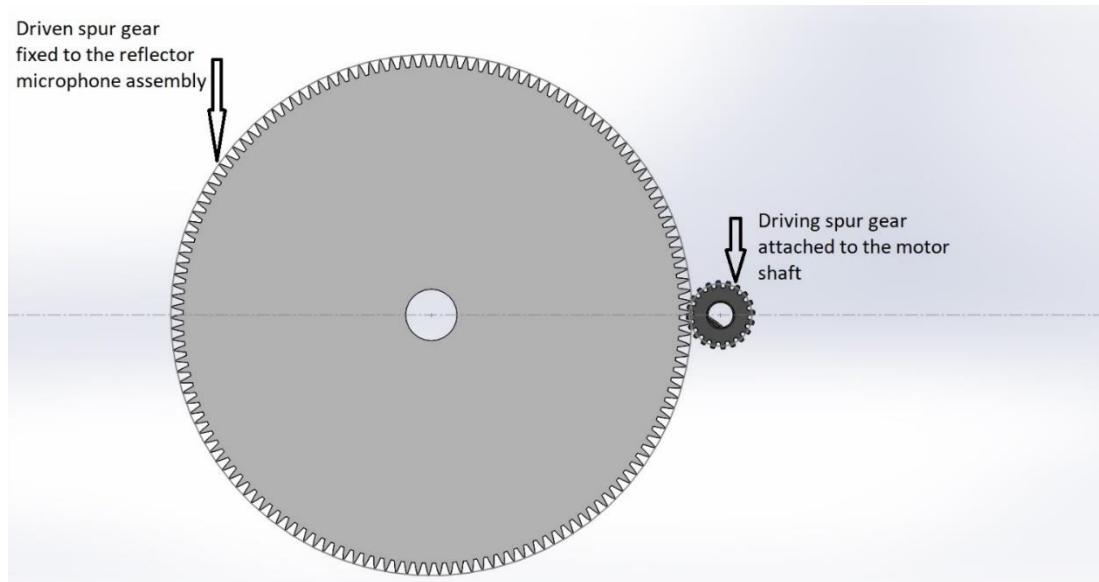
Meshing of the Spur gear attached to the reflector microphone assembly and the pinion attached to the stepper motor shaft.
